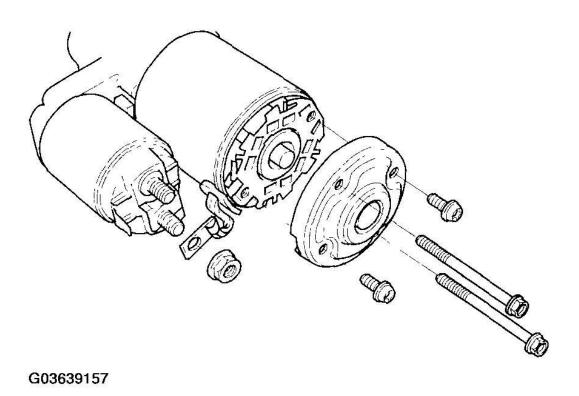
Installing End Cover To Retain Brush Holder Courtesy of AMERICAN HONDA MOTOR CO., INC.
